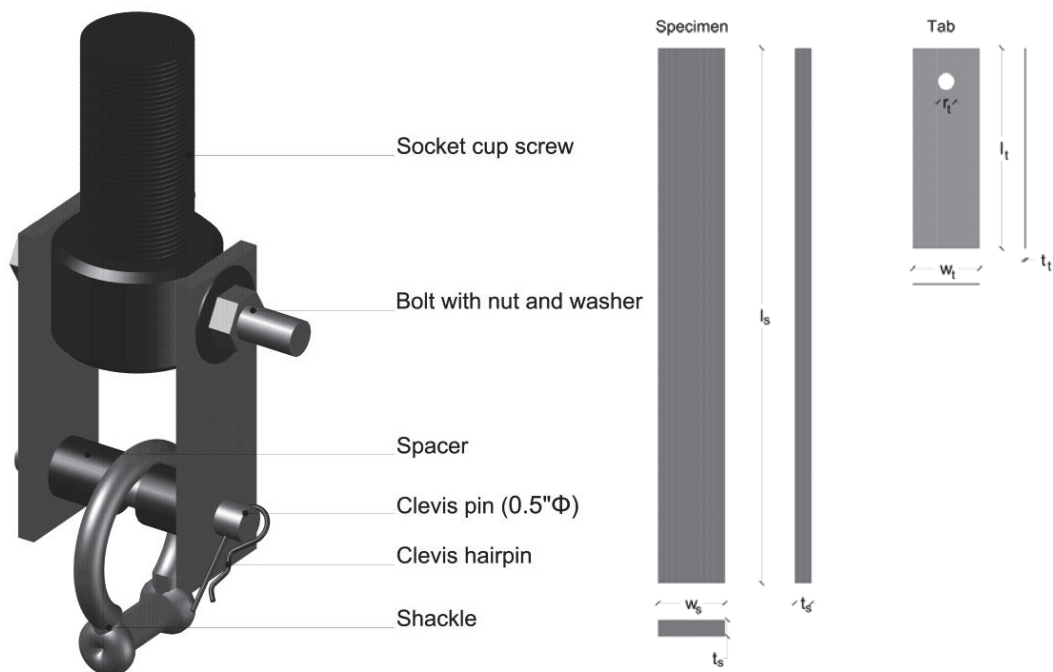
GRIPPING MECHANISM AND TYPICAL SPECIMEN DIMENSIONS
